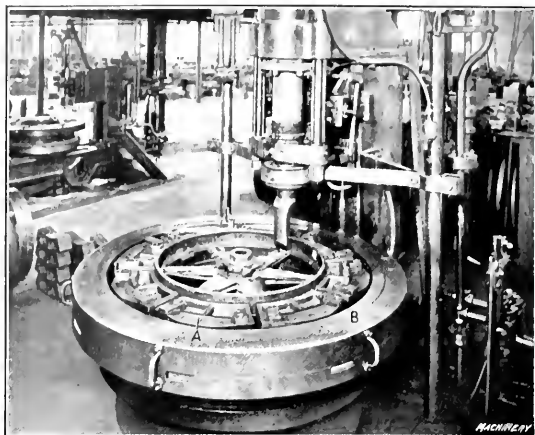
Hydraulic Riveter equipped with Special Clamping Fixture for holding Rim against Milled Ends of Arms
